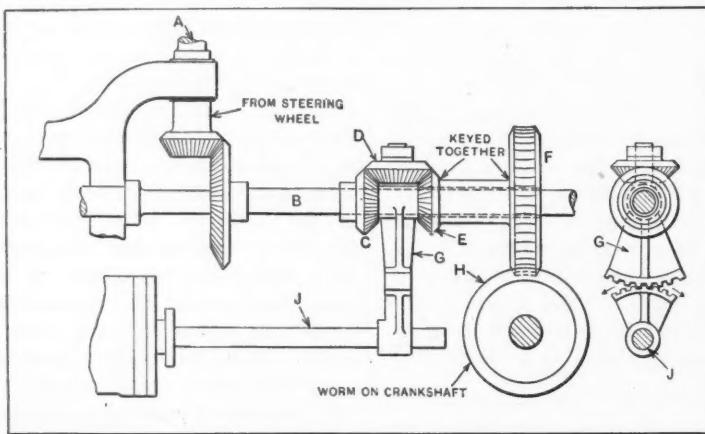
Steering Gear Control Mechanism having Differential Bevel Gearing
